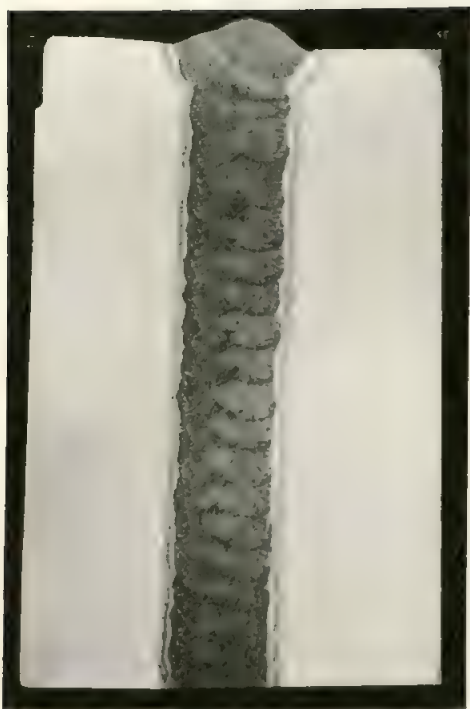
Cross section of narrow gap weld.
